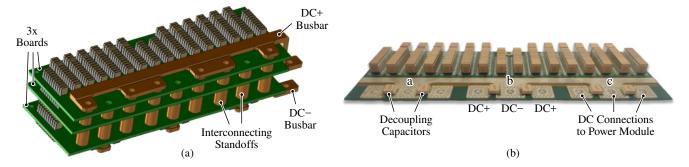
(a) 3D design view of the full-ceramic DC-link concept and (b) bottom view of the DC-link board directly connected to the power modules.
